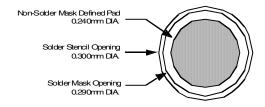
Recommended Non-Solder Mask Defined Pad Illustration
